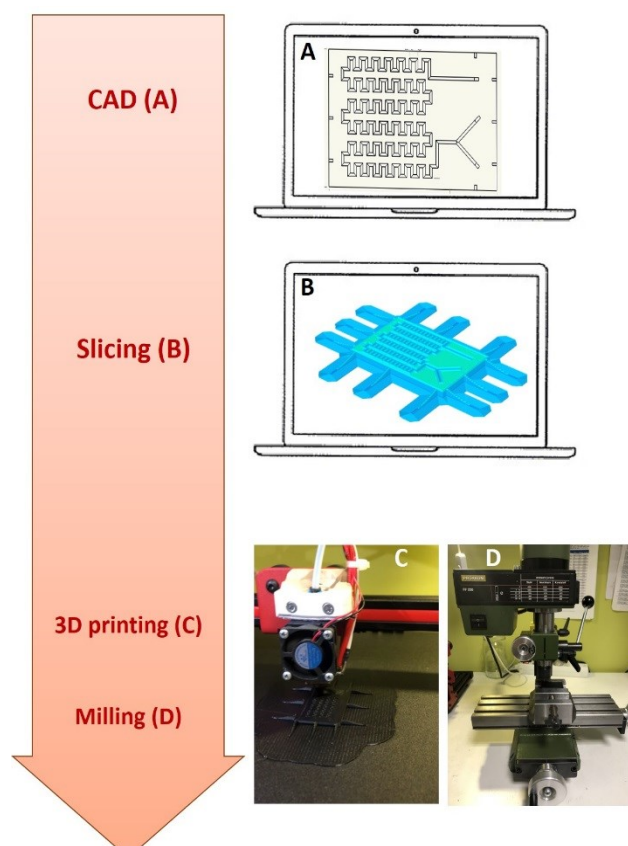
Flowchart for the chips manufacturing process. (A) CAD drawing. (B) Slicing of the CAD Drawing. (C) Printing of the chip (The Alfawise® 3D Printer used for the ABS printing is depicted on the picture). (D) Milling of the chip. (See section S2 for details)
